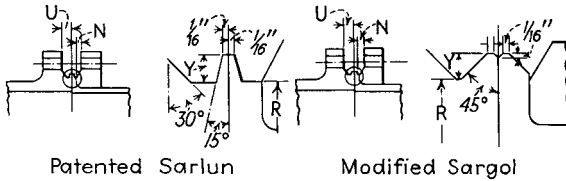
Typical flange facings (for dimensions, see ASME B16.5).
